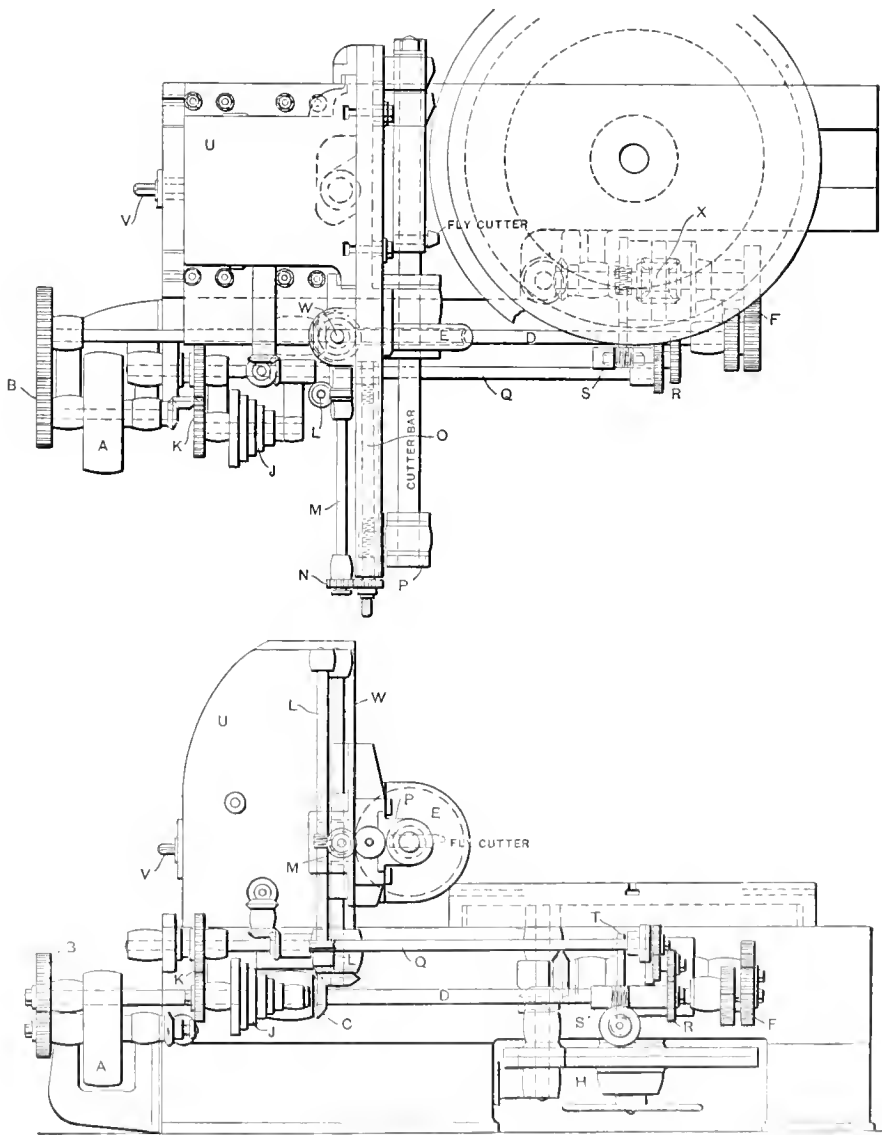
Diagram of the Driving Connections of Eberhardt Bros. Machine.
